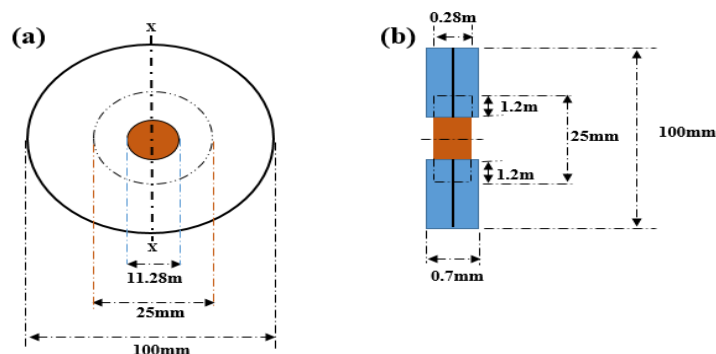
Schematic representation showing (a) dimensions of the masked additively manufactured samples (b) cross-sectional view with the corresponding dimension.
